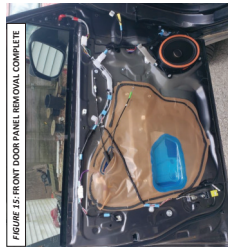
FRONT DOOR PANEL REMOVAL COMPLETE
